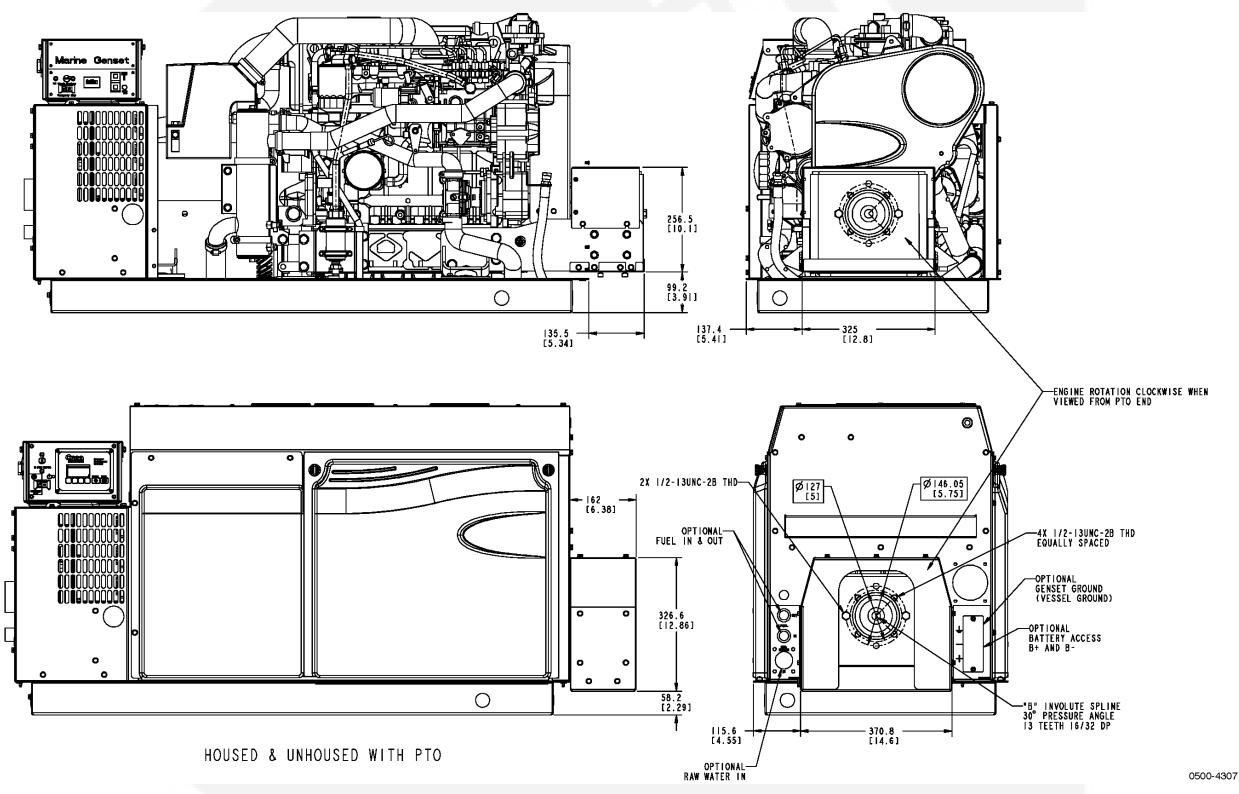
MDKBK OUTLINE DRAWING (SHEET 1)
